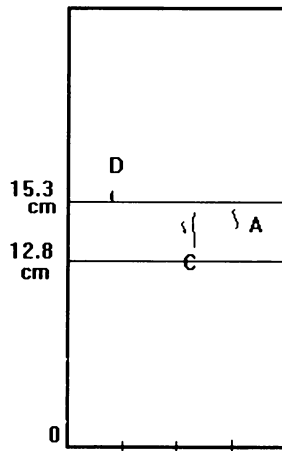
Developed view of specimen J-4 with locations of surface cracks identified by penetrant testing.
